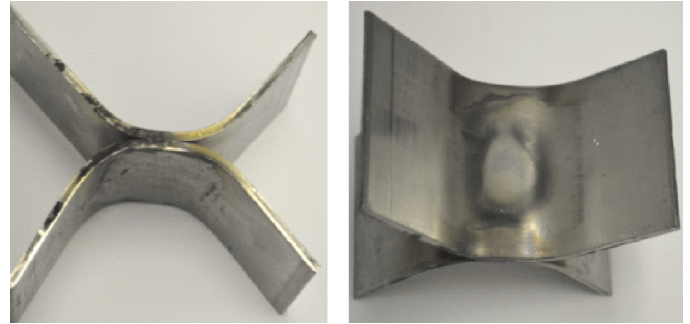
Friction spot weld–AISI 304 – 3.5 mm.
